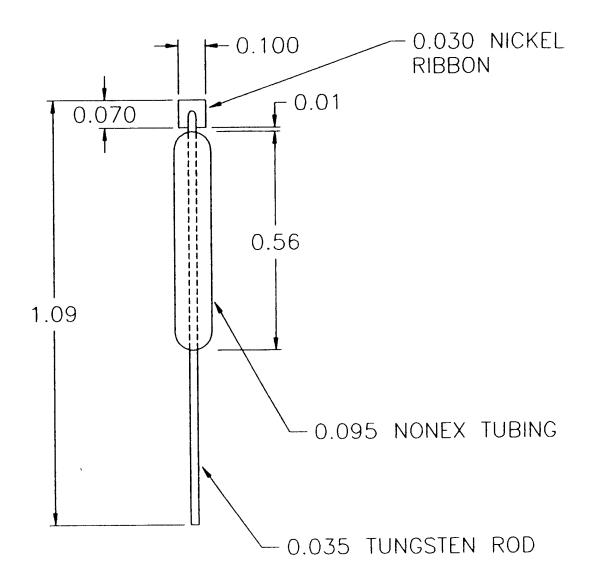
Bottom Leg Assembly for Outer Jacket
